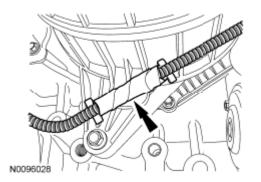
Locating A/C Compressor Wiring Harness Pin-Type Retainer Of Intake Manifold Courtesy of FORD MOTOR CO.
